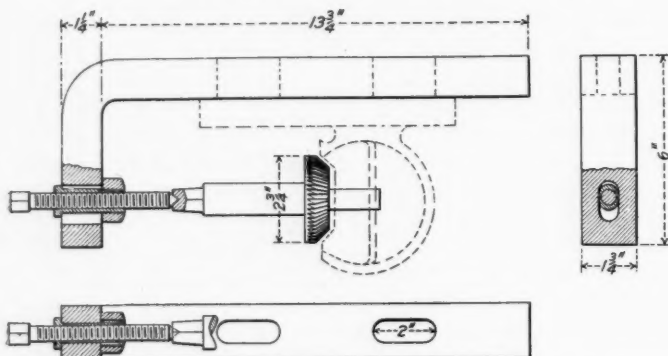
Brace and Reamer for Reseating Inside Boiler Checks.
